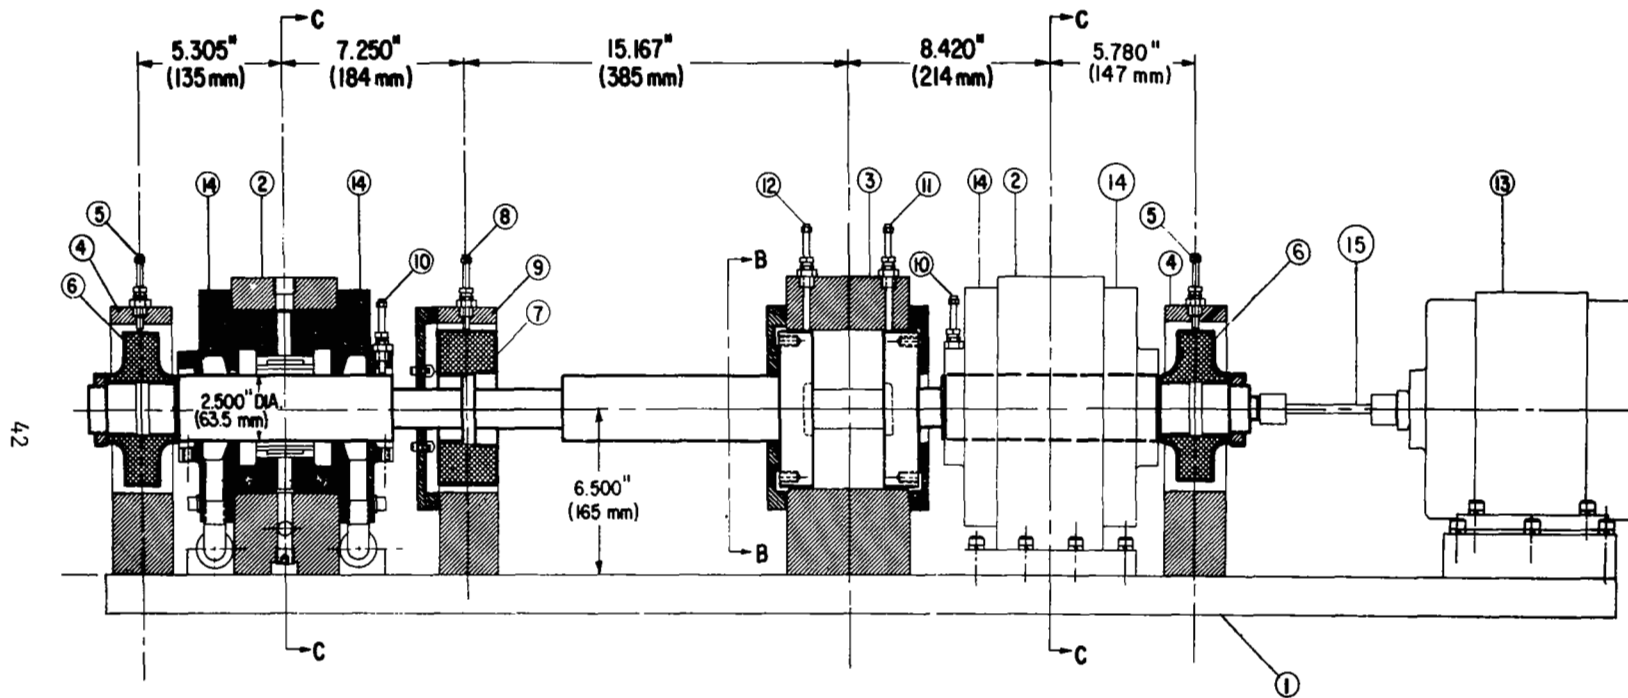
Assembly Drawing of Flexible-Rotor Test Rig
